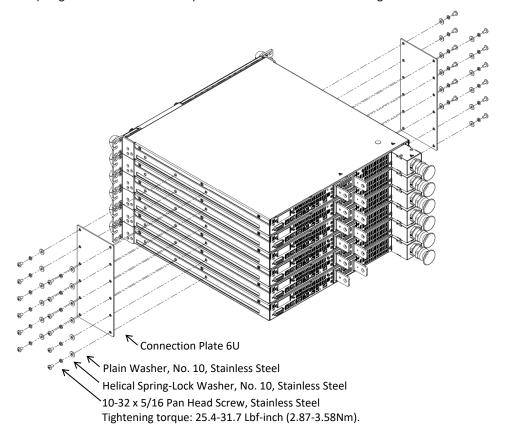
Six 60V-100V Units Connection Plates 6U Assembly
